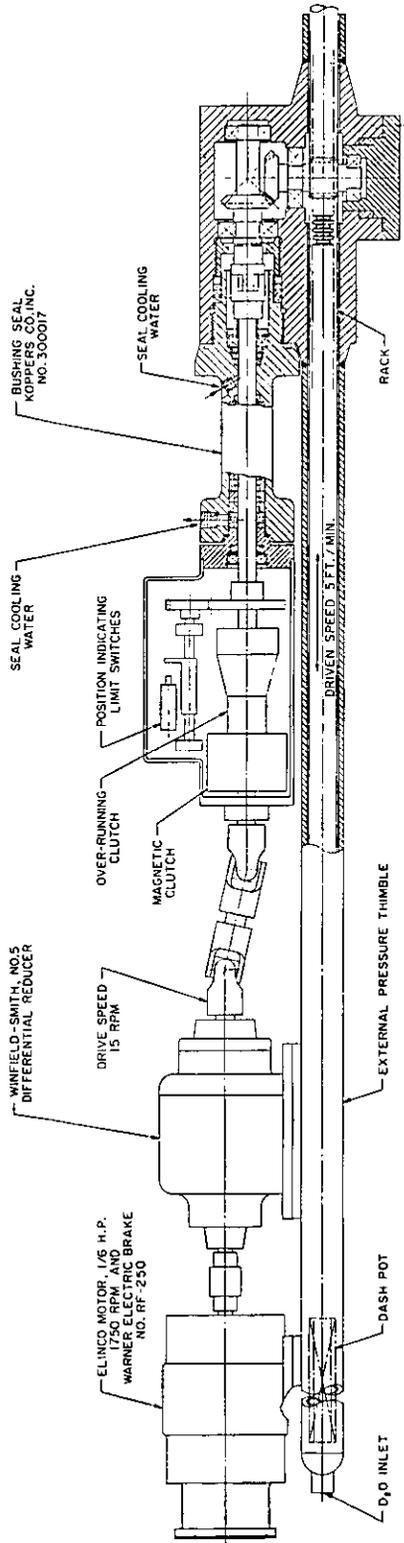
PRESSURE VESSEL REACTOR - SAFETY ROD - BOTTOM DRIVE -
